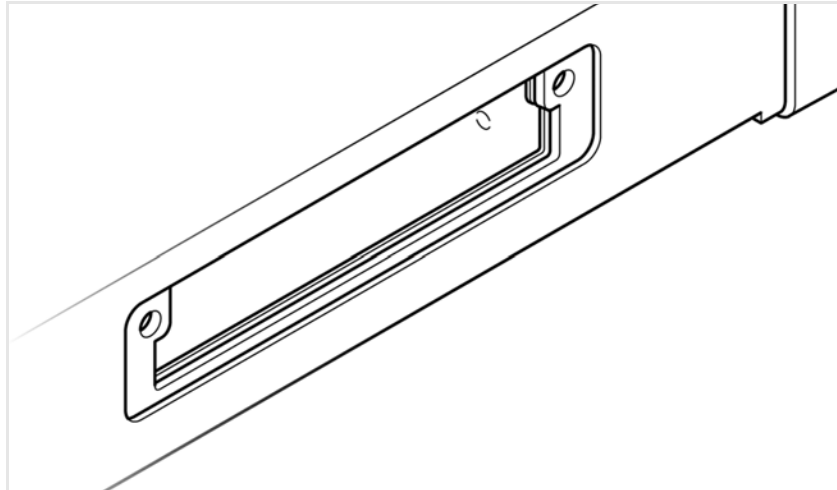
Rear of Analyzer with Blank Plate Removed
